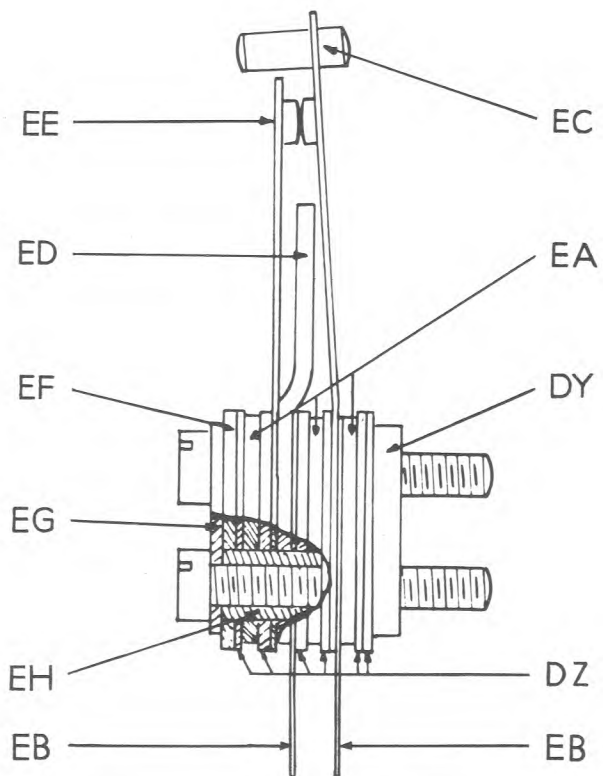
CONTACT ASSEMBLY C.P. 3921/108
